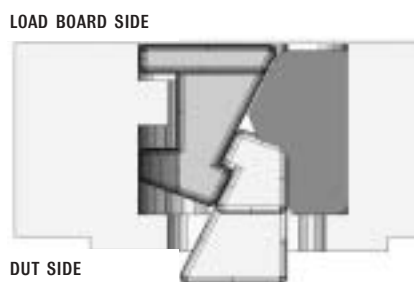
THE ASSEMBLED CENTER BODY CONTACT.
